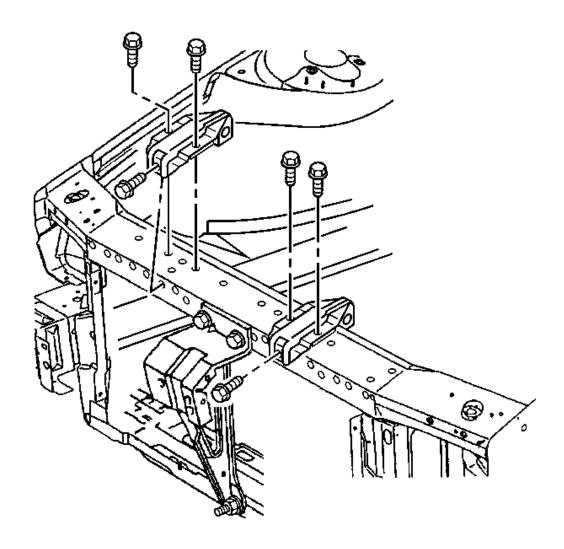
Removing Engine Mount Strut Bracket From Upper Radiator Support Courtesy of GENERAL MOTORS CORP.
